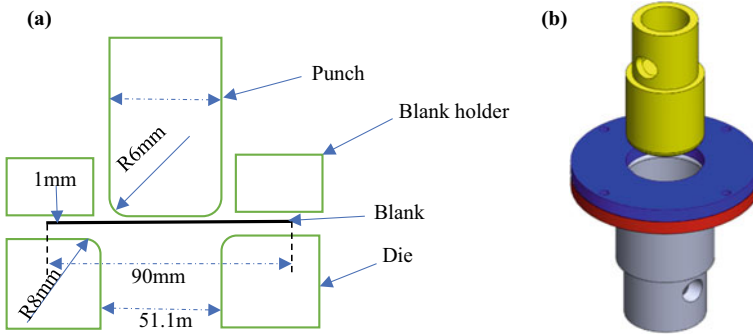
a Schematic illustration and b surface model assembly of deep drawing setup
